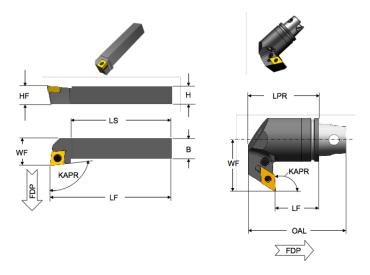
Cutting Tool Measurement Diagram 2 (Cutting Tool, Cutting Item, and Assembly Item – ISO 13399)
